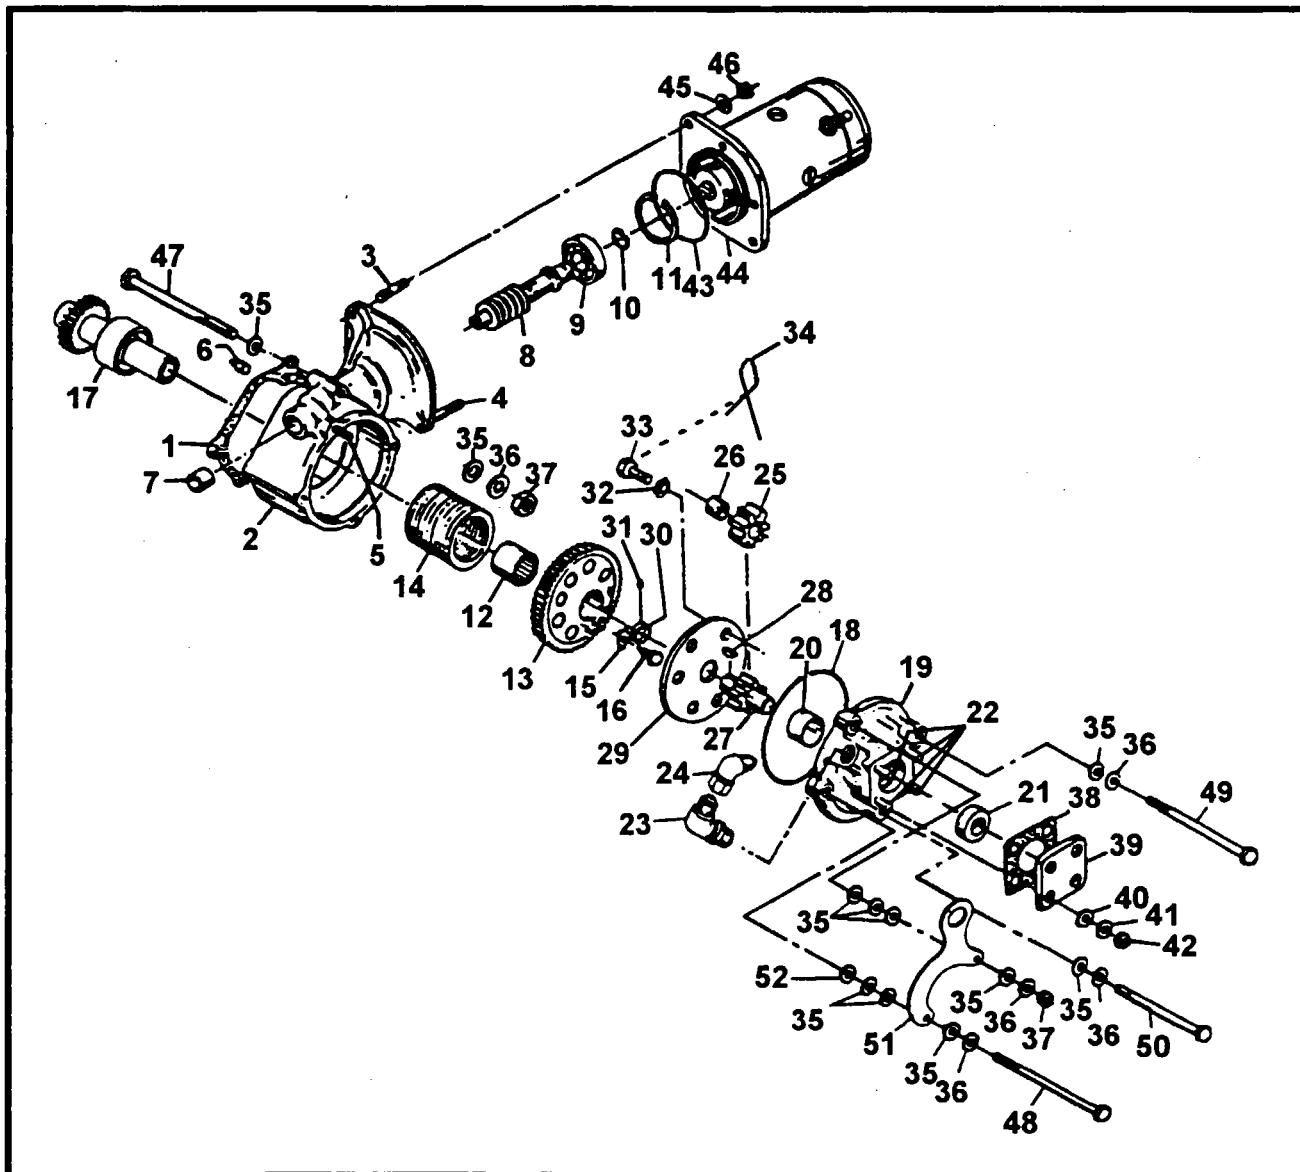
OPTIONAL STARTER ADAPTER ASSEMBLY (TSI0-360-RB)
